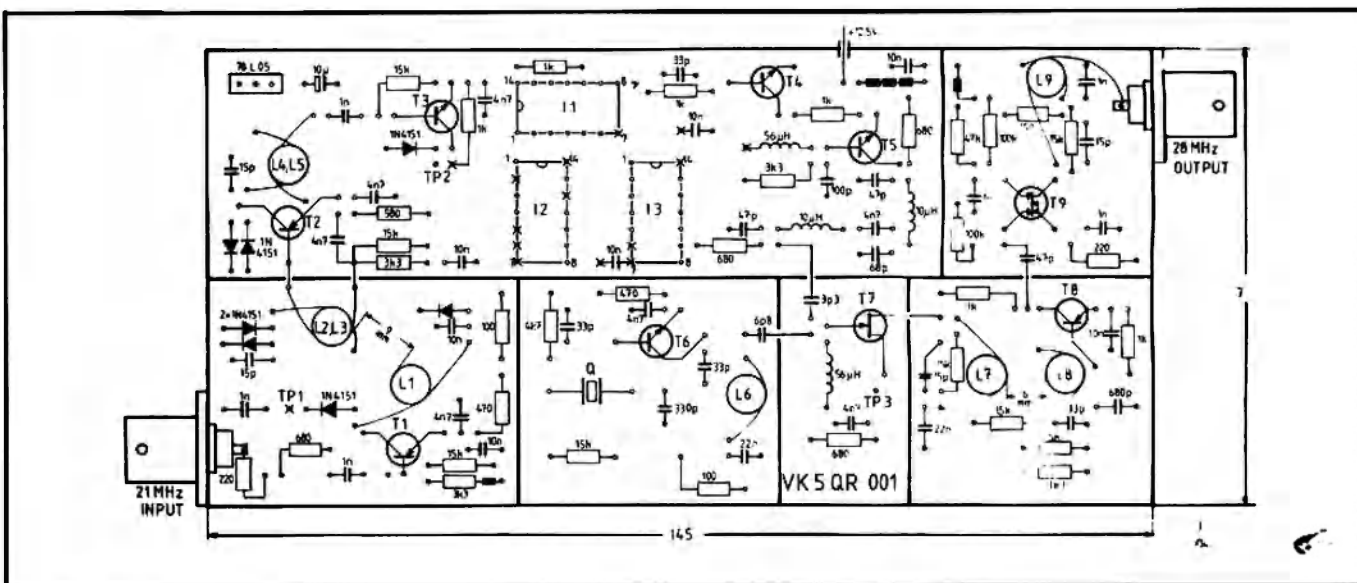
Component mounting diagram for the processor PCB VK5QR 001.
